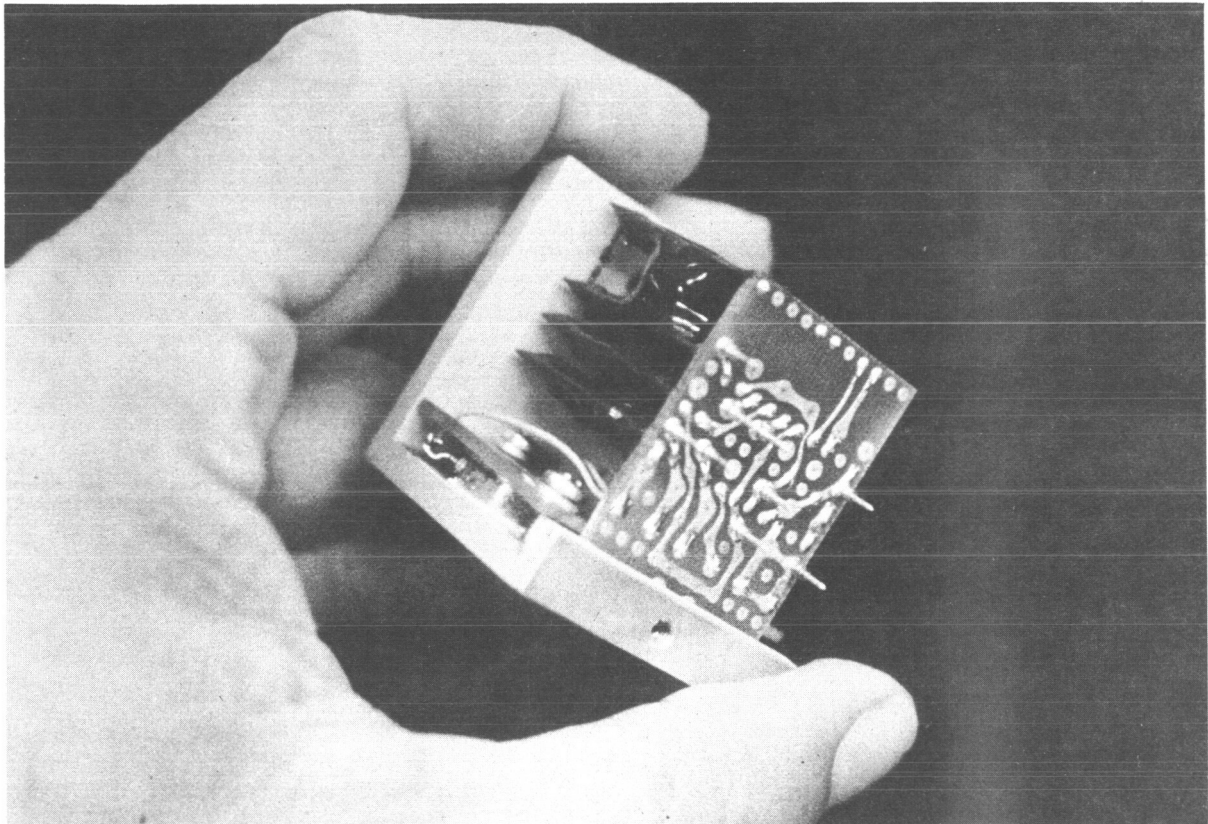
Hybrid Inverter Module Assembly After Conformal Coating
